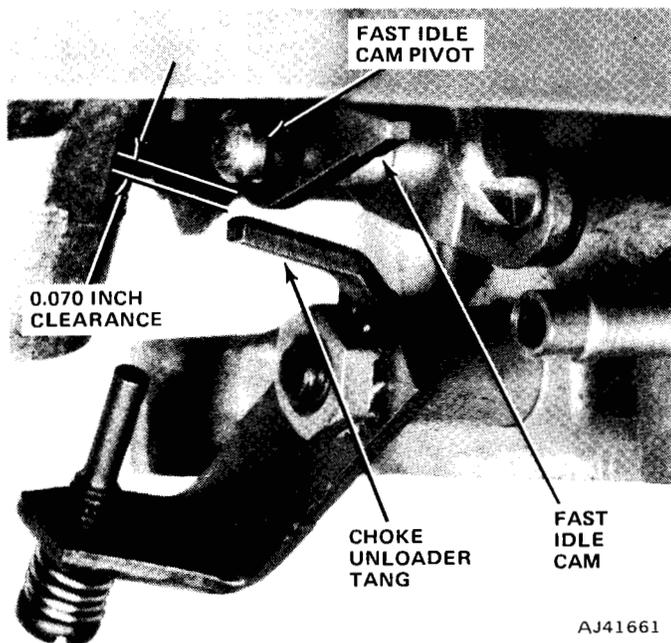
Unloader-to-Fast-Idle-Cam Clearance
